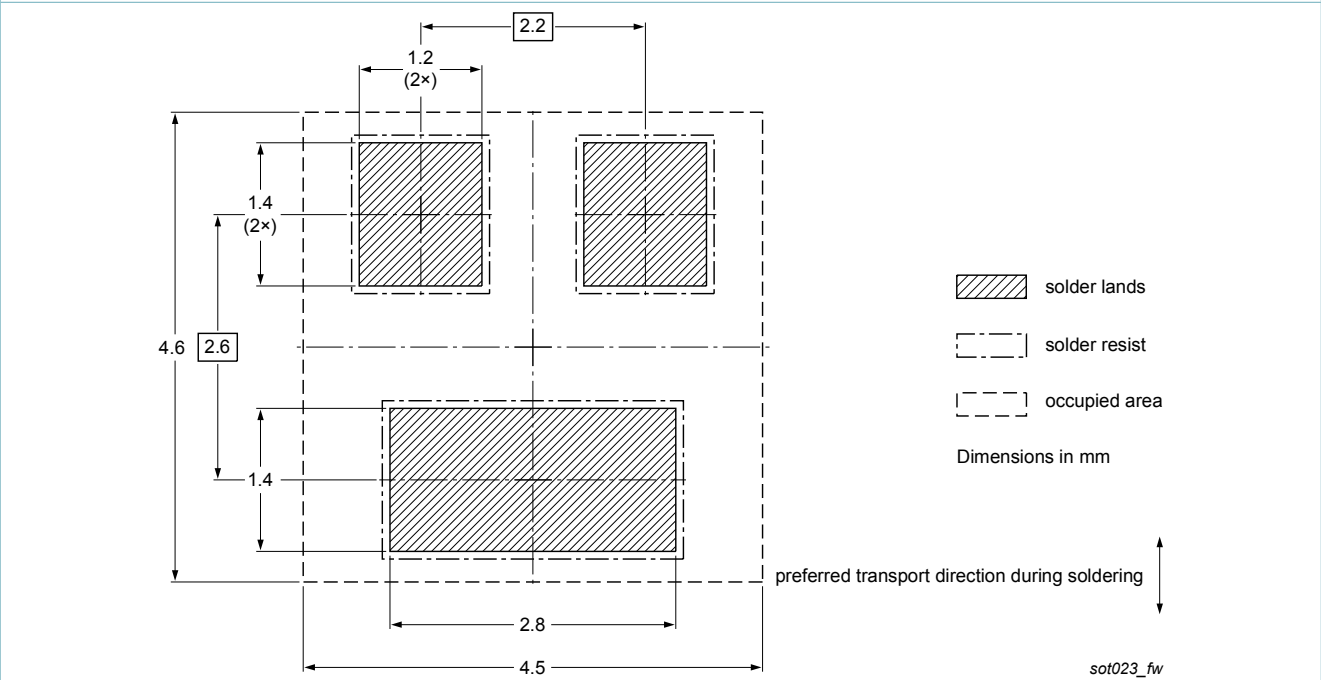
Wave soldering footprint for TO-236AB (SOT23)
